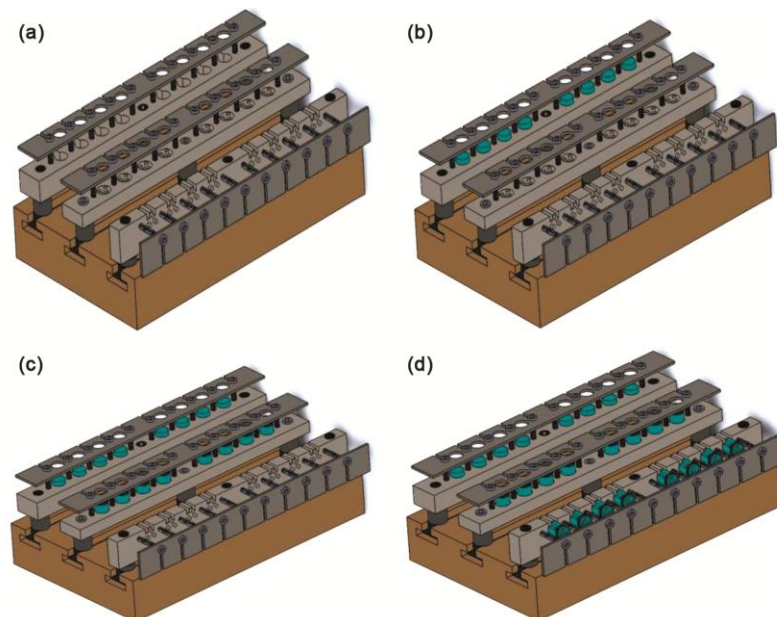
Equipped Type-B fixture for VMC operations: (a) Fixture without fuse bodies (b) Fixture with 8 work parts (c) Fixture with 16 work parts, and (d) Fixture with 24 work parts
